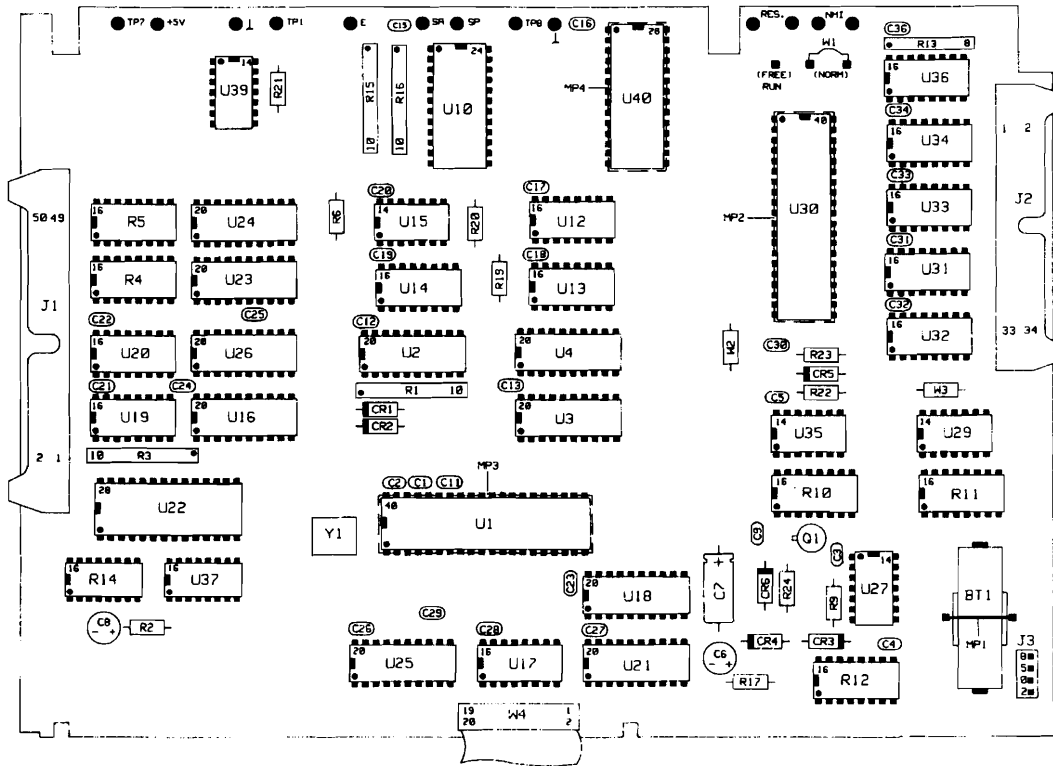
Microprocessor Board A3 Component Layout and Locator
